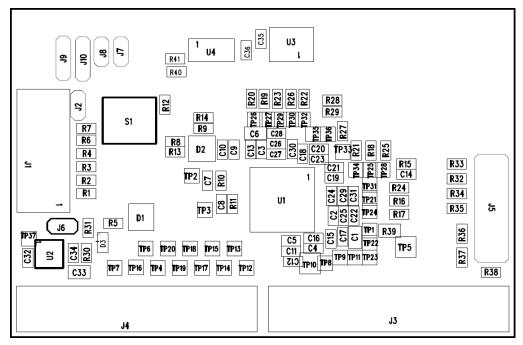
UCD3138064EVM-166 Top Layer Assembly Drawing (top view)
